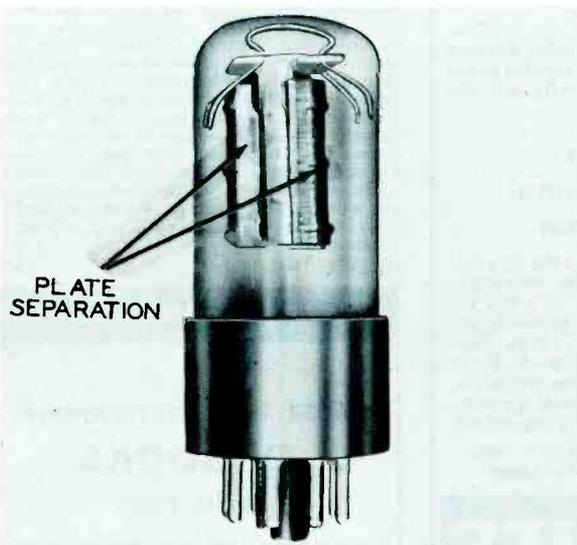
A 6V6GT Tube Defective Because of Broken Welded Bond Due to Excessive Heat Dissipation.
